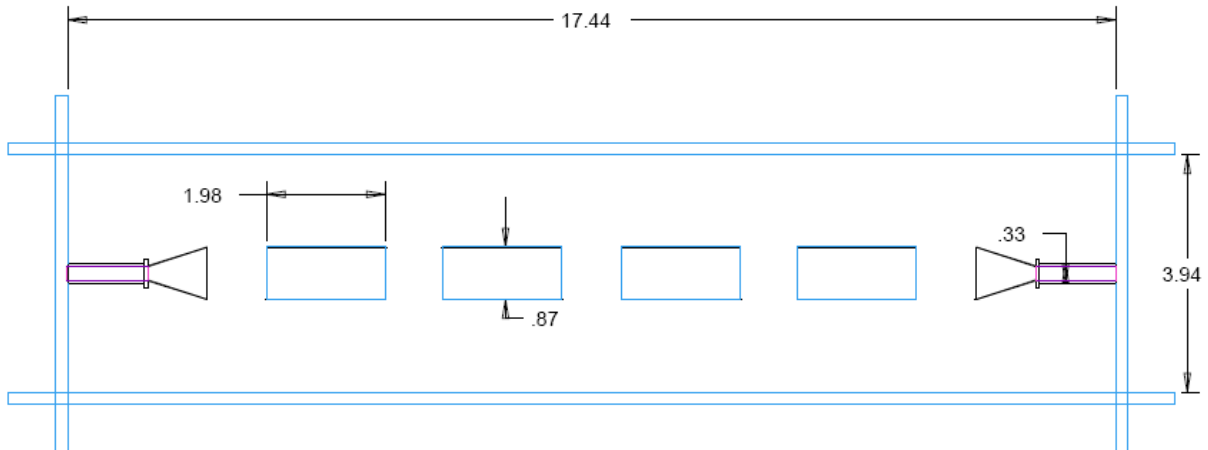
Top view of the mould used for the lower section. Glass coverslips were used in mould for leaving empty groves for the placement of coverslip with the cell monolayer.
